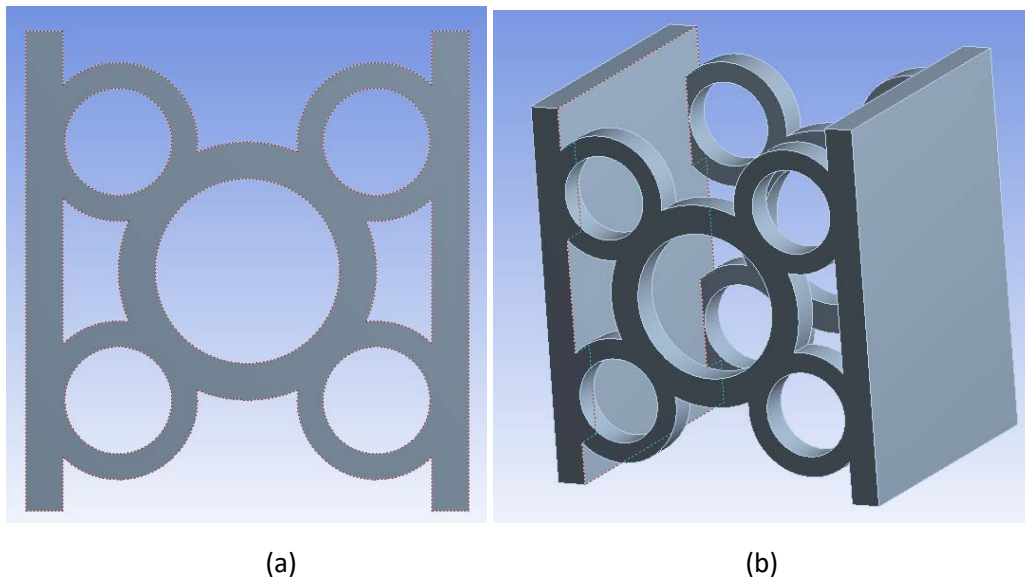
TSI-2 Geometry: (a) Elevation, (b) 3D view
